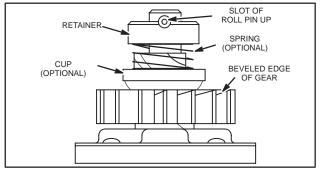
ASSEMBLING STARTER MOTOR DRIVE
